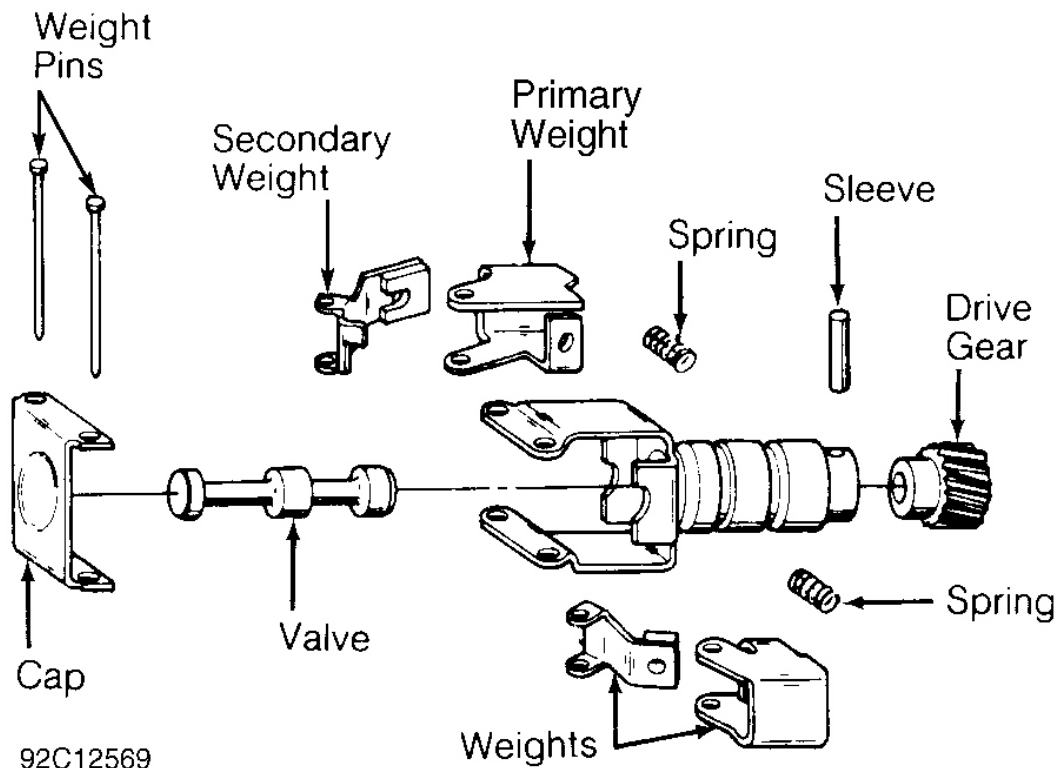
Exploded View Of Governor Assembly (4L60 Only)
